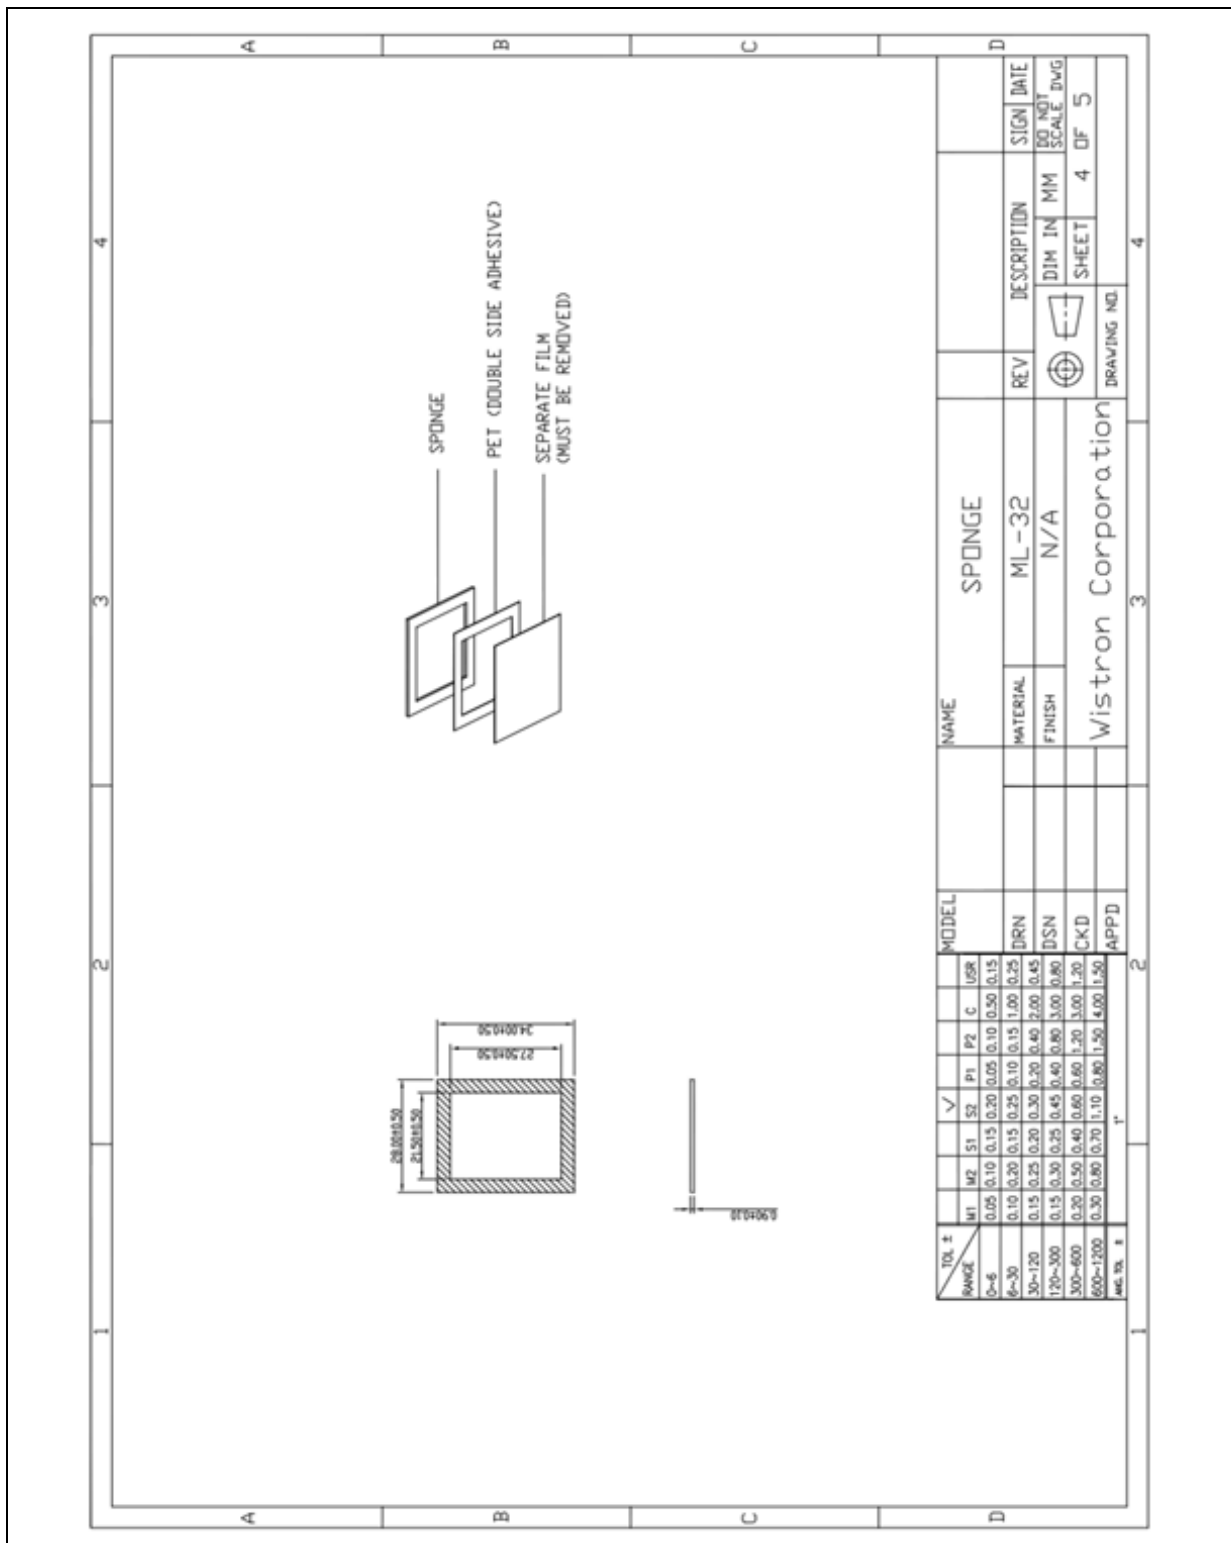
Low-Profile Torsional Clip Heatsink Mechanical Interface Pad Drawing
